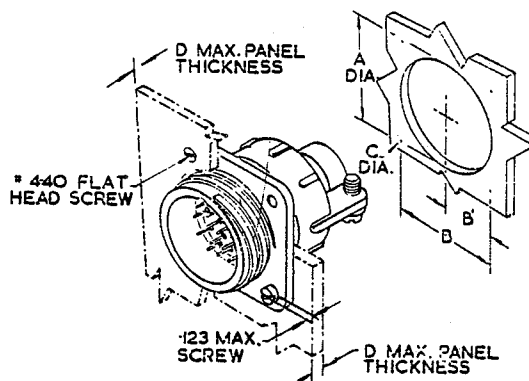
Large flange receptacle mounting dimensions (Table 4)
